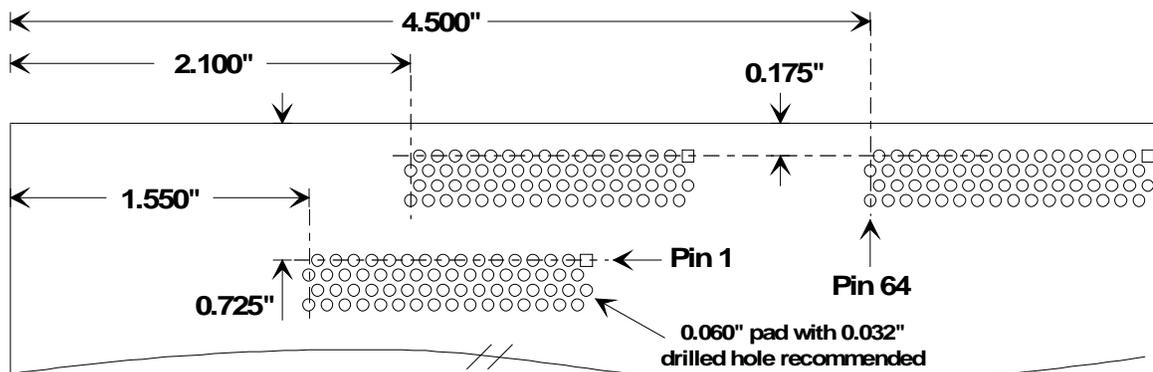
I/O Connector locations for ASIC Test Bed Printed Circuit Board.
